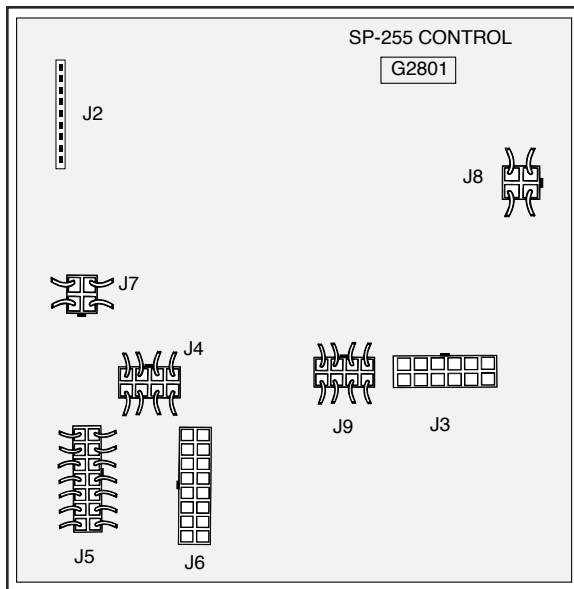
Control Board Molex Plug Locations for G2801 PC Control Board.
